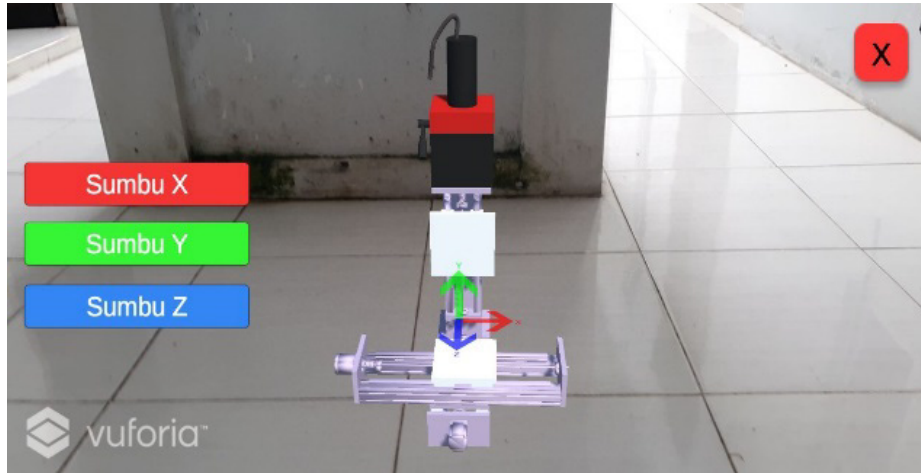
Sledge of 3-Axis CNC milling machine (3D)
